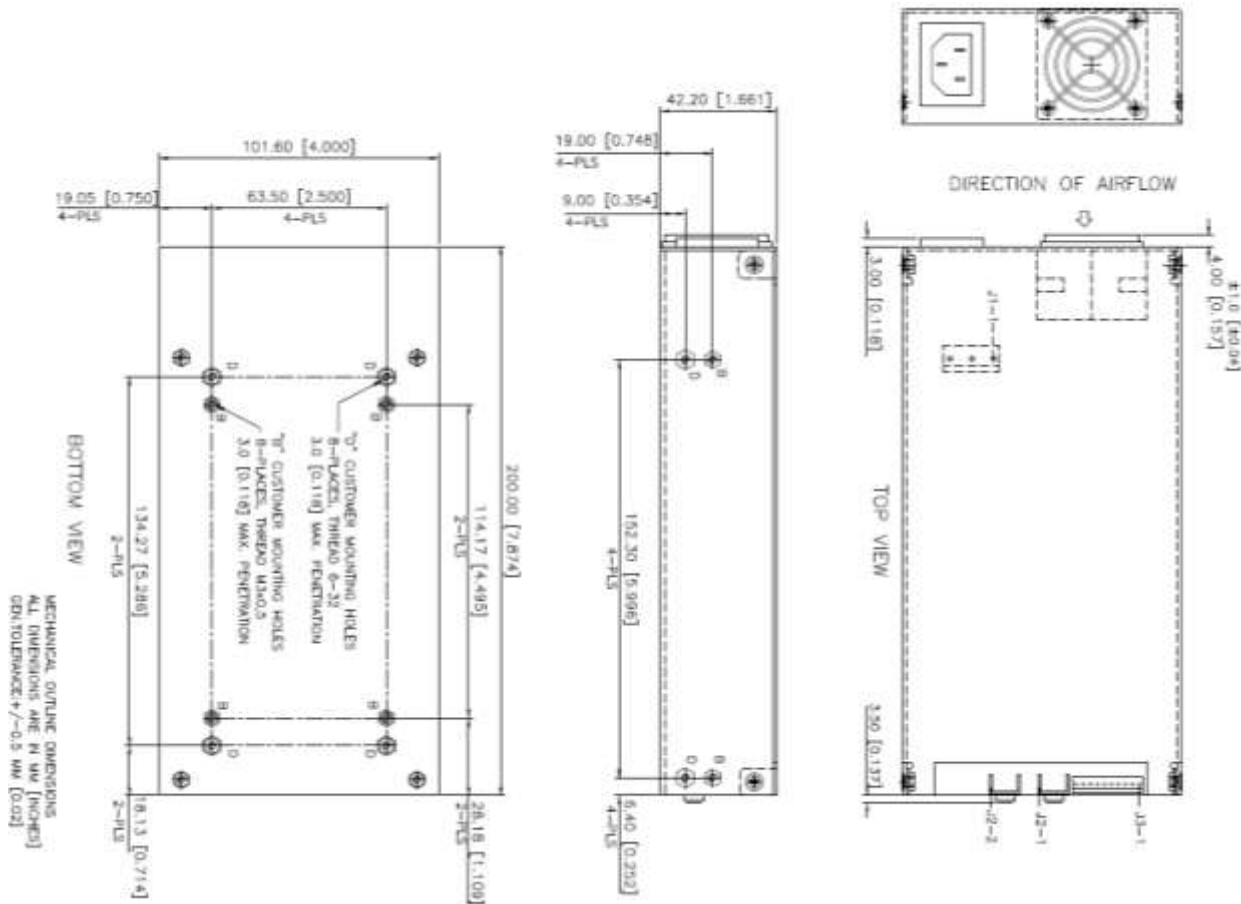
Dimensions Drawing (With Side Fan Mounting)
